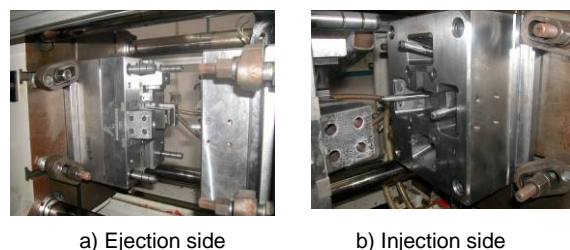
Hybrid mould: a) Ejection side b) Injection side
